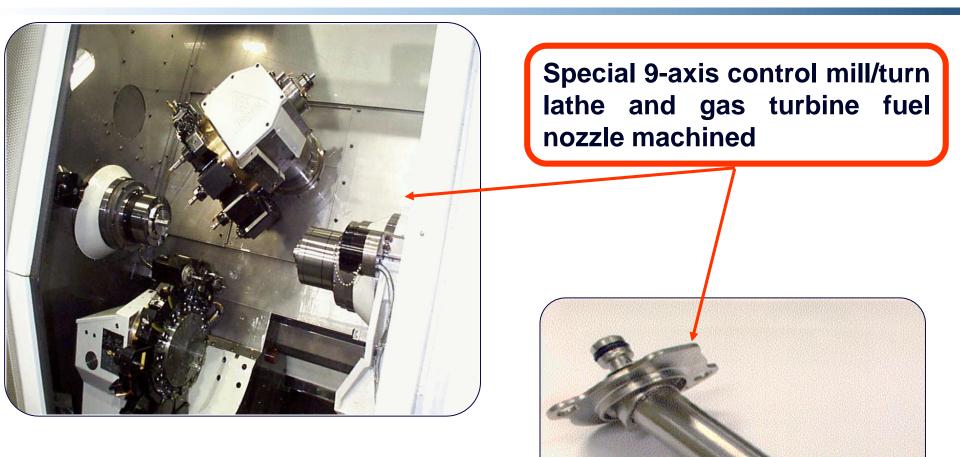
9-axis control mill/turn lathe 2 spindles, 2 turrets; 28 tool positions,1 milling head,6 tool changer (Photo Pratt & Whitney, Canada)
